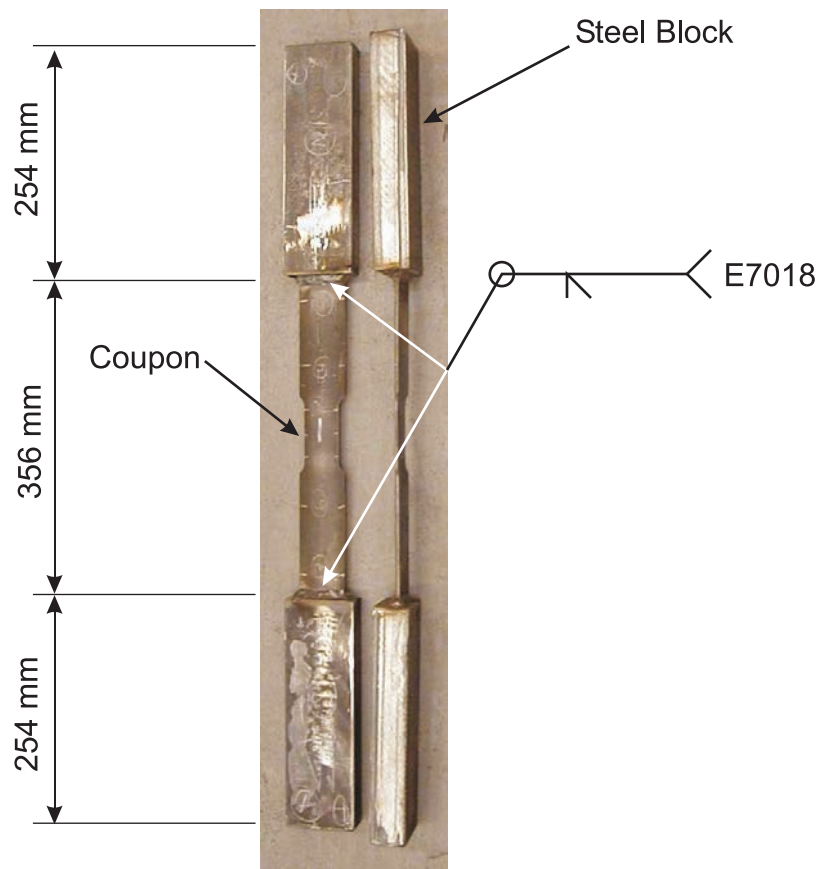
Coupon Welded to Steel Blocks
